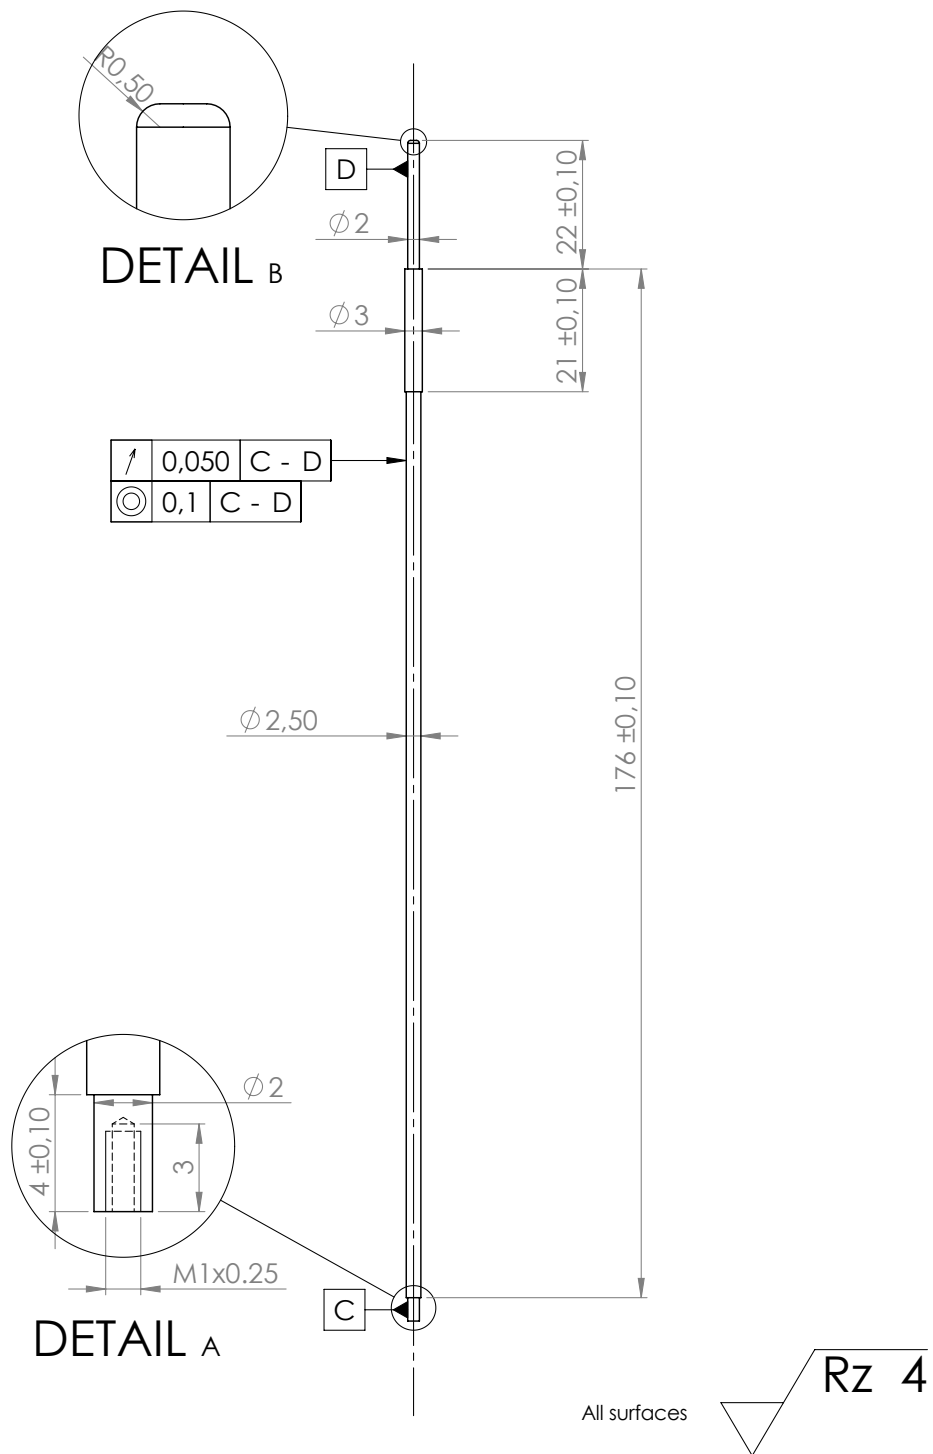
Technical drawing of the titanium rod electrodes within the glass cell science chamber. Dimensions are given in millimeter. Material: 3.7035
